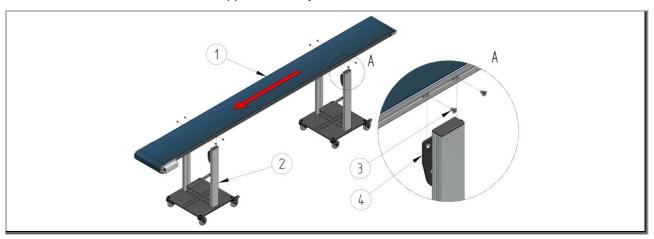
Assembly, conveyor with support BE 020 – BM 120 (typical)
